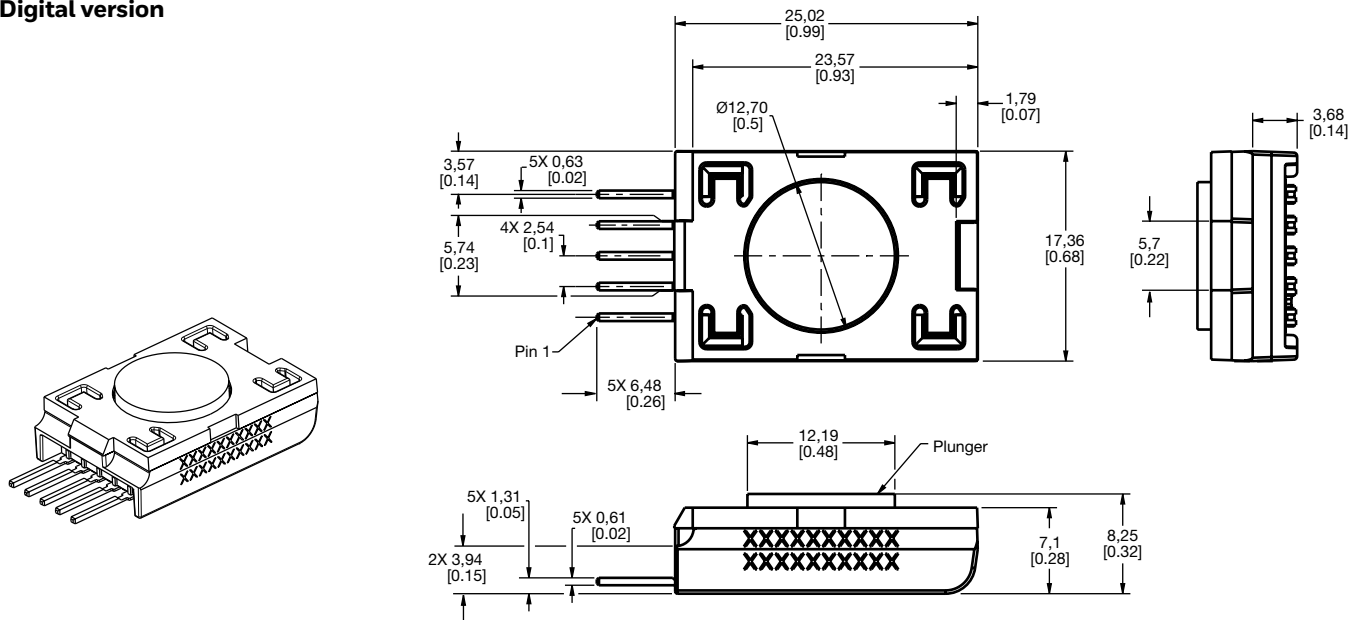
Mounting Dimensions (For reference only: mm/in.)
